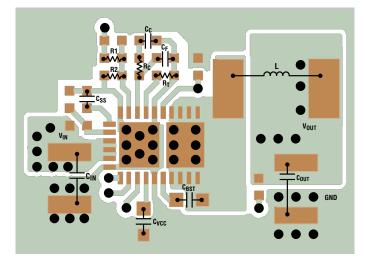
Top Layer PCB Layout and Component Placement in the LT3690 Demonstration Board
